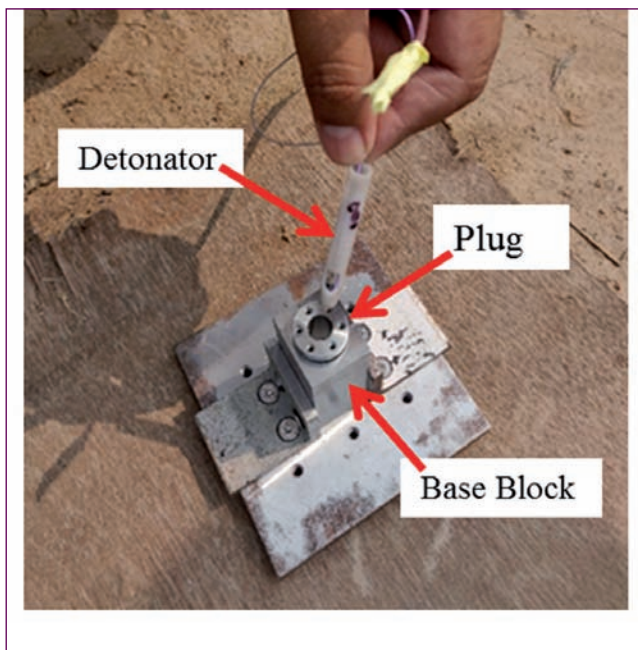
Photograph of explosive welding setup for SG tubes
